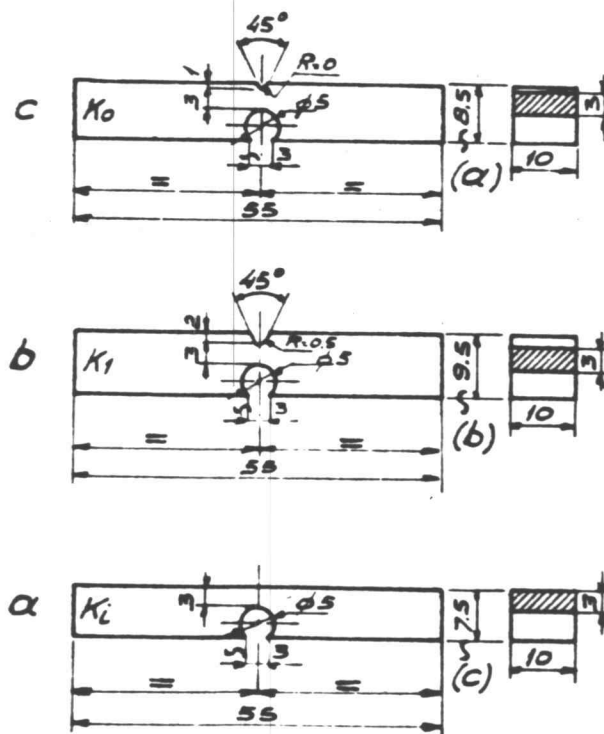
The three Schnadt impact specimens. A hardened steel pin is fitted tightly into the 5 mm holes. The hammer of the impact machine strikes the pin. Accordingly, the fractured section is entirely in tension. Dimensions in millimeters.
